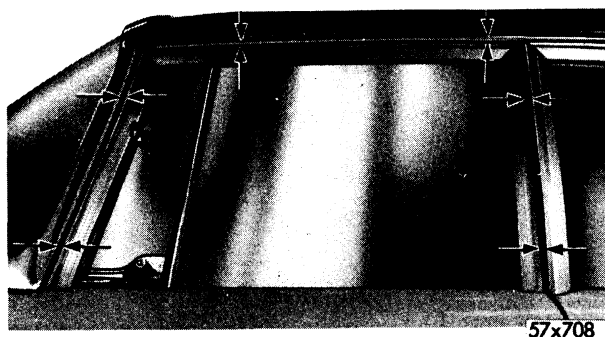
Aligning Upper Door Glass Frame to Roofline and Rear Door
